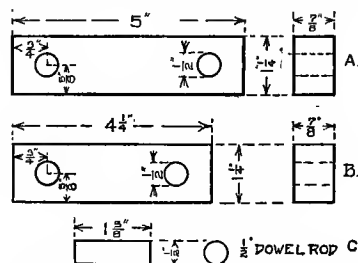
d*—Complete Mechanical Drawings of Cross-Pieces and Pin for Bench-Hook
